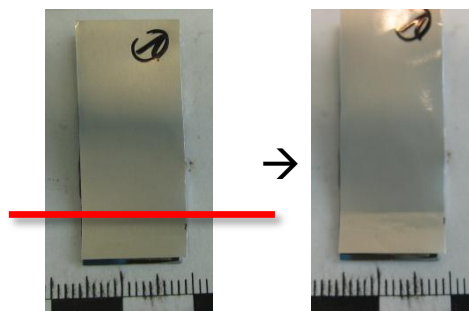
Welding the pouch foil onto the substrate. Left: Test sample prior to welding. The red line indicates the area of the welding. Right: Sample after welding with visible weld seam in the same area.
